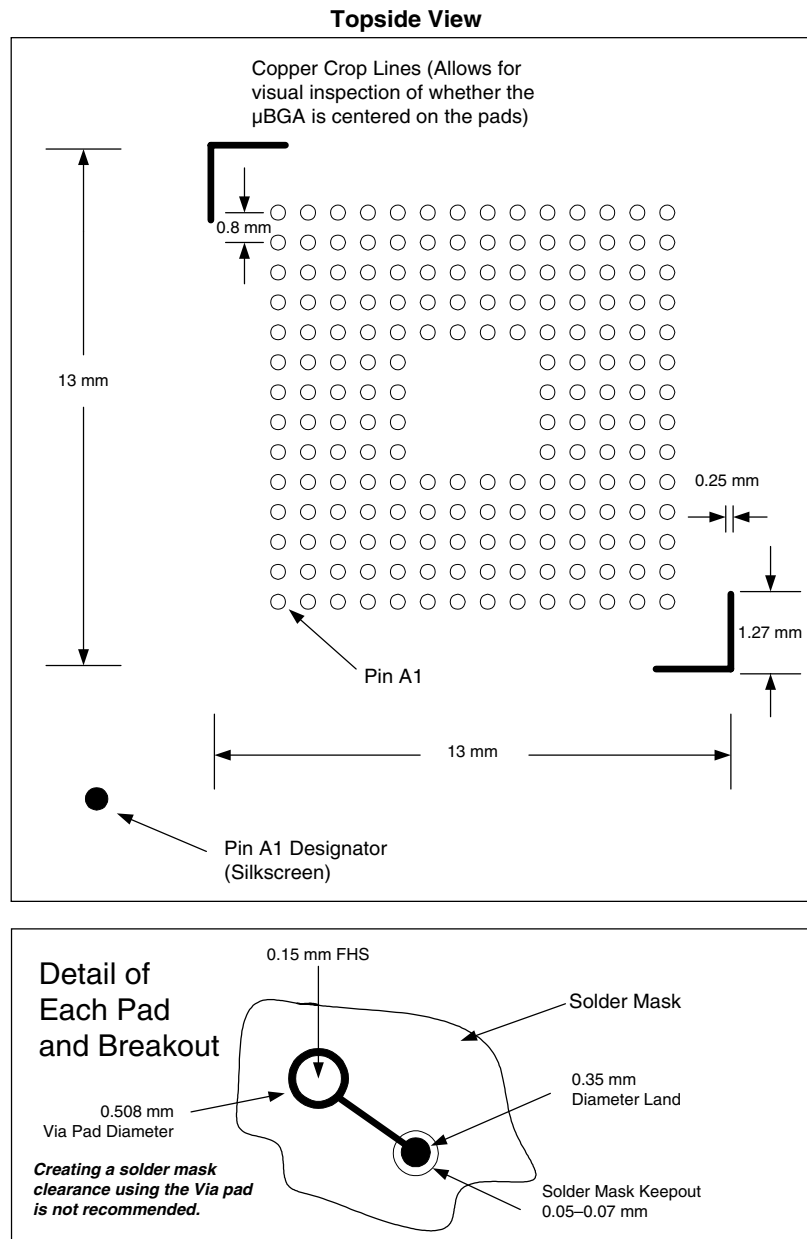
180-Pin μ BGA PCB Layout Suggested Land Pattern
